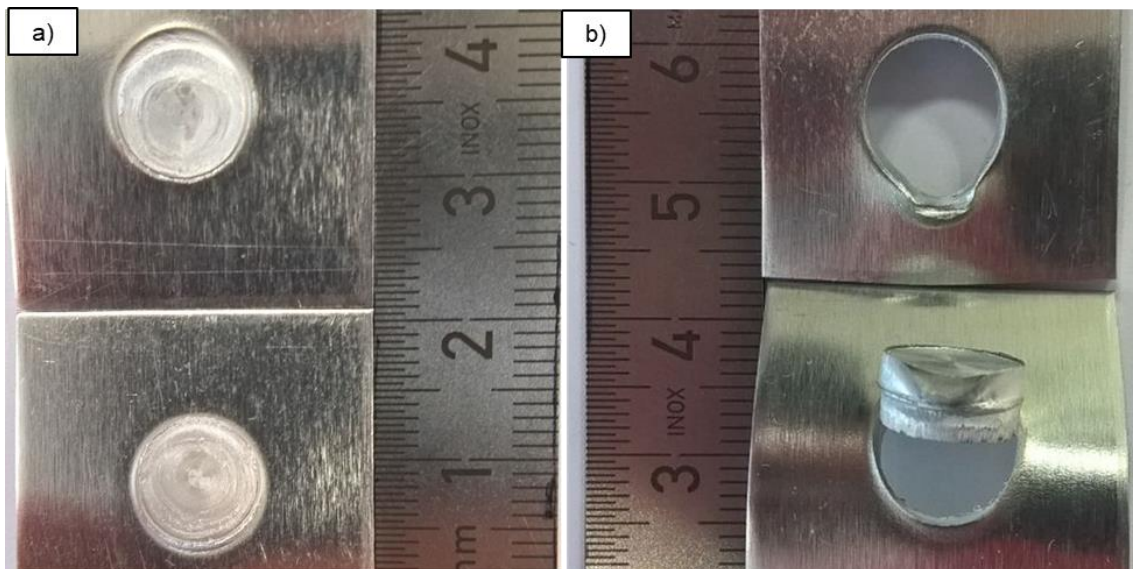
Fracture modes observed during Static Mechanical tests. a) Through weld fracture (TW) b) Pull-Out fracture (PO).
